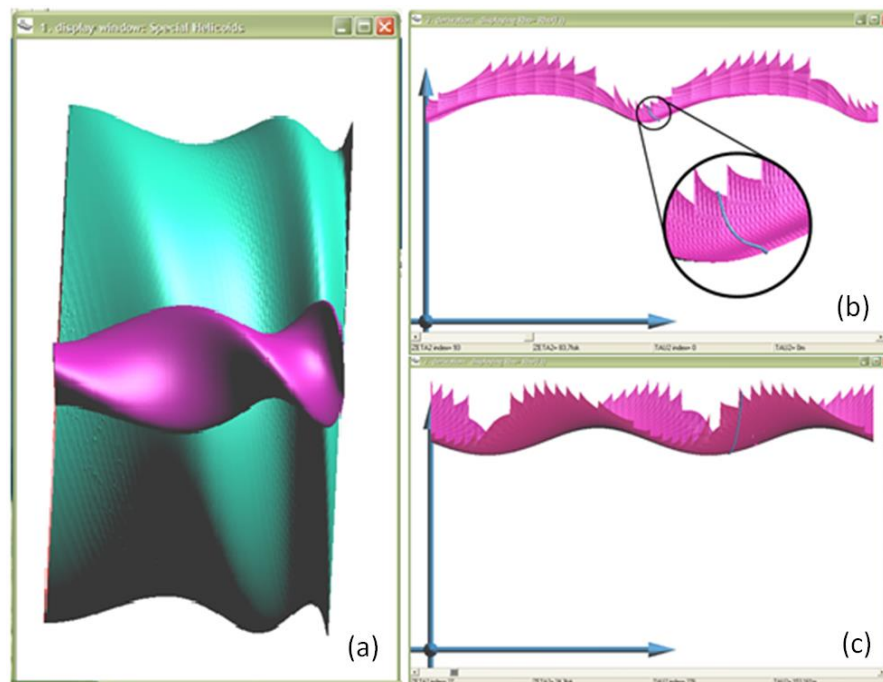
The rotor and the special grinding wheel (a), inflexion means undercut (b) and the perfect valley form of checking surface (c).
